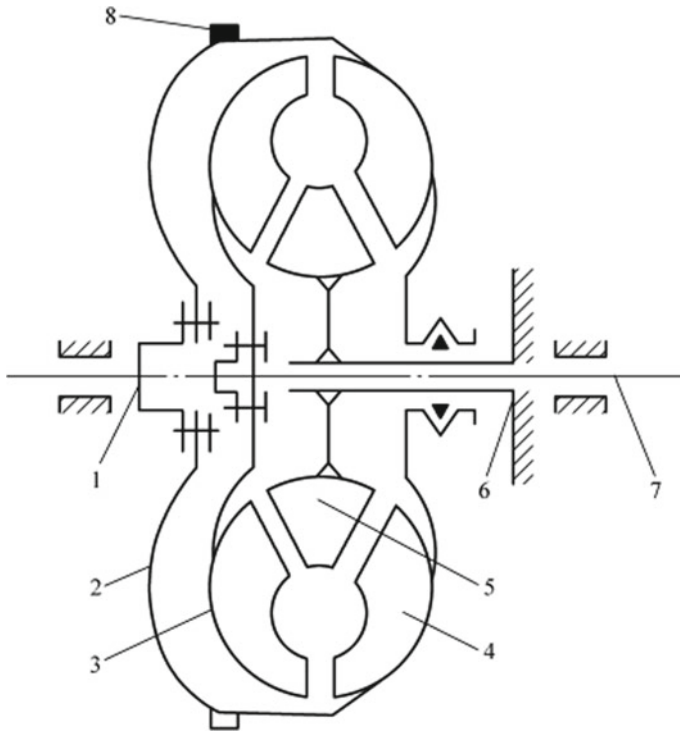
Structure diagram of hydraulic torque converter. 1—engine crankshaft, 2—hydraulic torque converter housing, 3—turbine, 4—impeller, 5—guide wheel, 6—guide wheel fixing casing, 7—driven shaft, 8—starting gear ring
